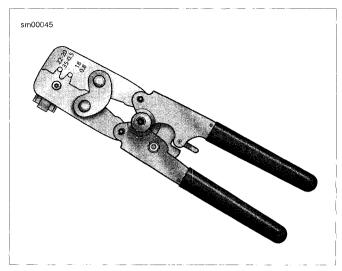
Packard Micro 64 Terminal Crimper (HD-45929)
